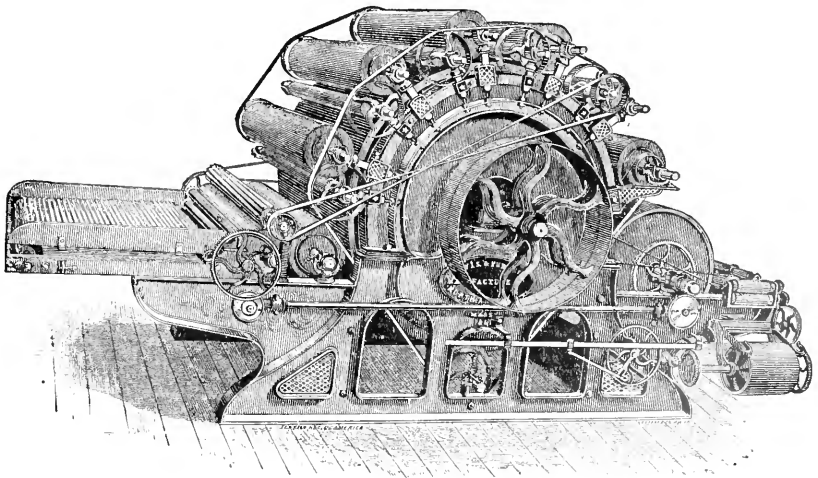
AN AMERICAN CARDING MACHINE—FIRST BREAKER.
